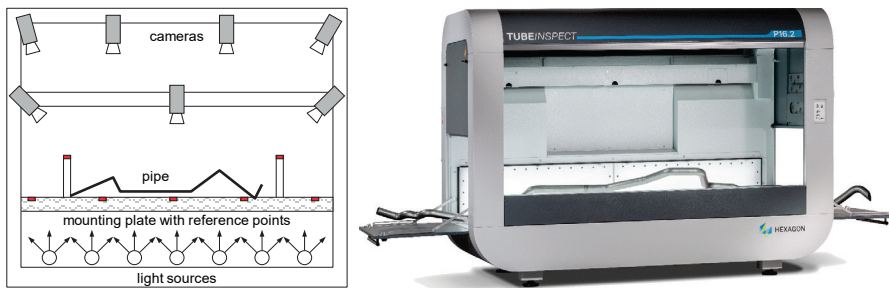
Online system for check measurement of tubes (Hexagon).
